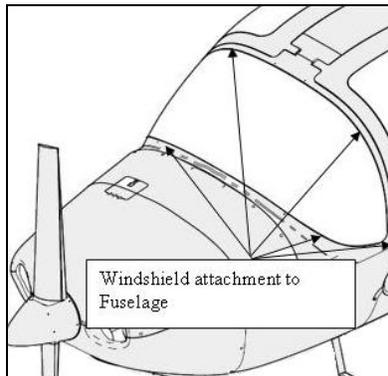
Location Of The Windshield Attachment With The Fuselage
